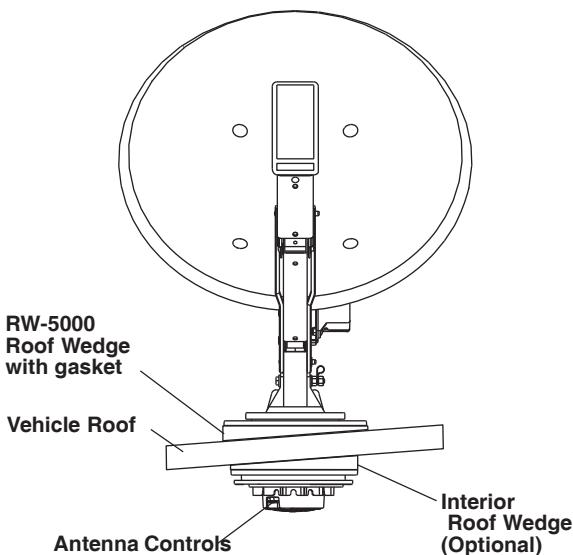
Winegard Model RW-5000 roof wedge with gasket is available. If inside roof wedge is needed, Winegard's RW-1000 can be trimmed to fit ceiling plate.
